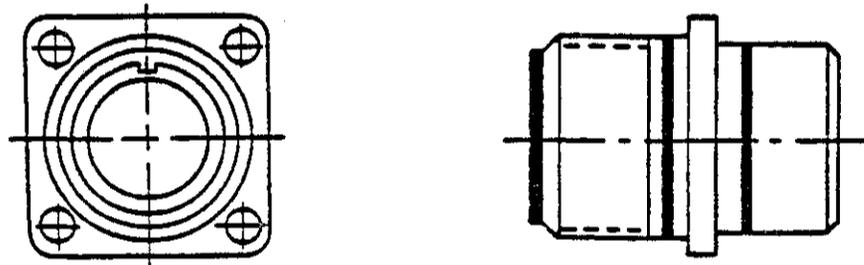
Box mounting receptacle, MIL-C-5015.
